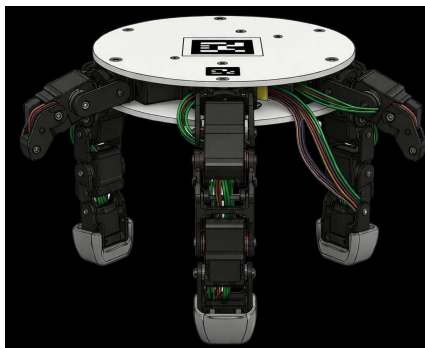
Isometric view of the dual-mode robotic end-effector, illustrating the dual-plate "sandwich" chassis and multi-jointed limbs.
